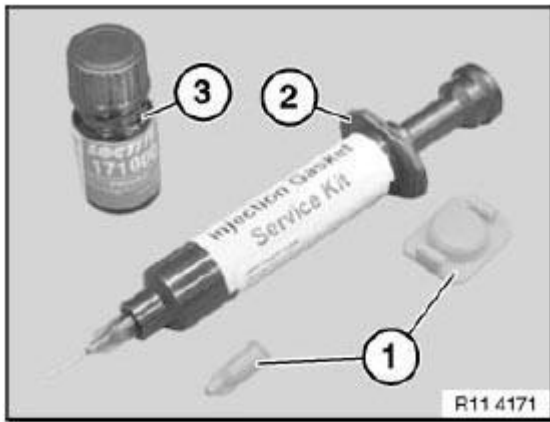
Identifying Injector, Sealing Compound And Bottle
